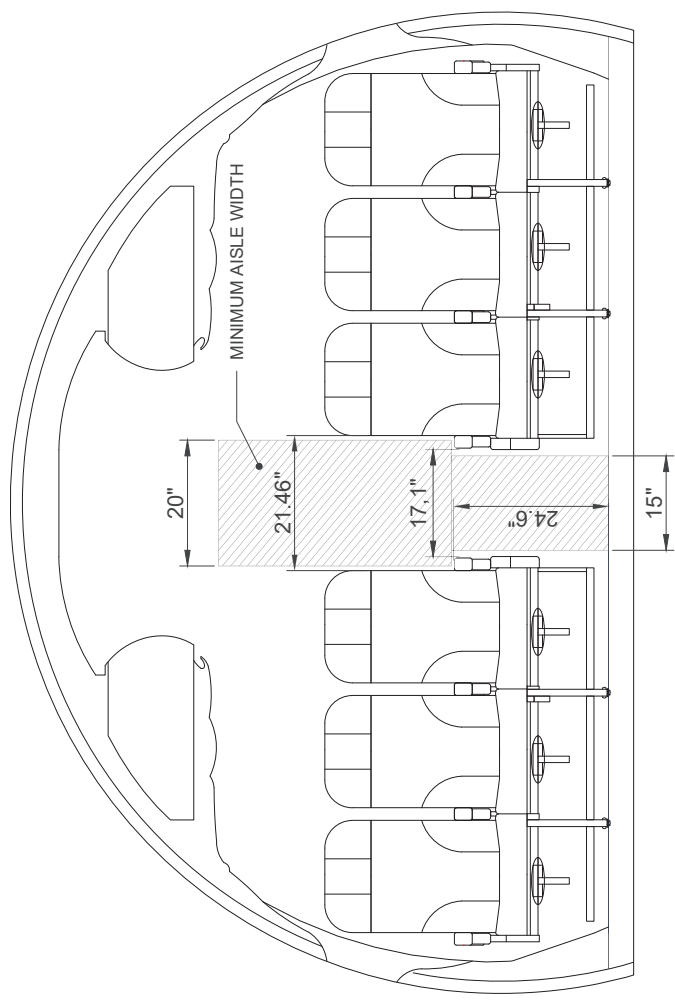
D1. CONSTANT SECTION FRONT VIEW - MINIMUM AISLE WIDTH REQUIREMENTS
